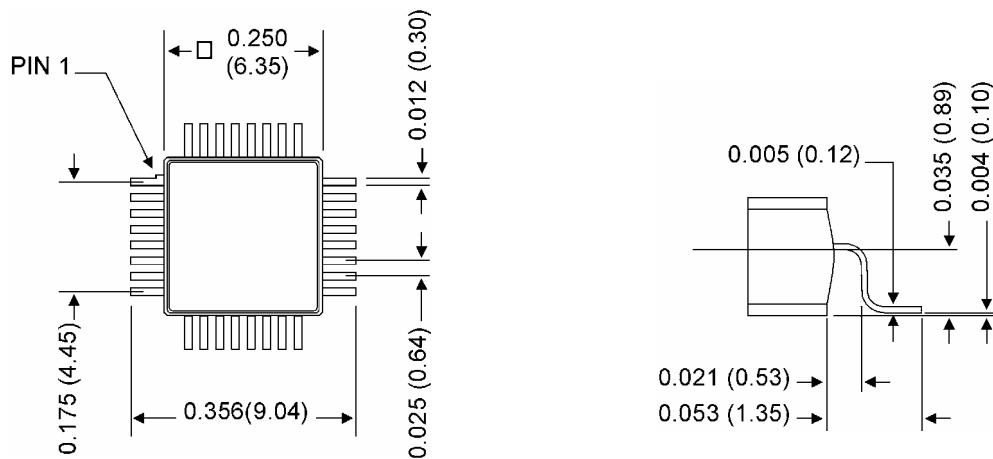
RDA012LP-QP package, dimensions shown in inches (mm).
